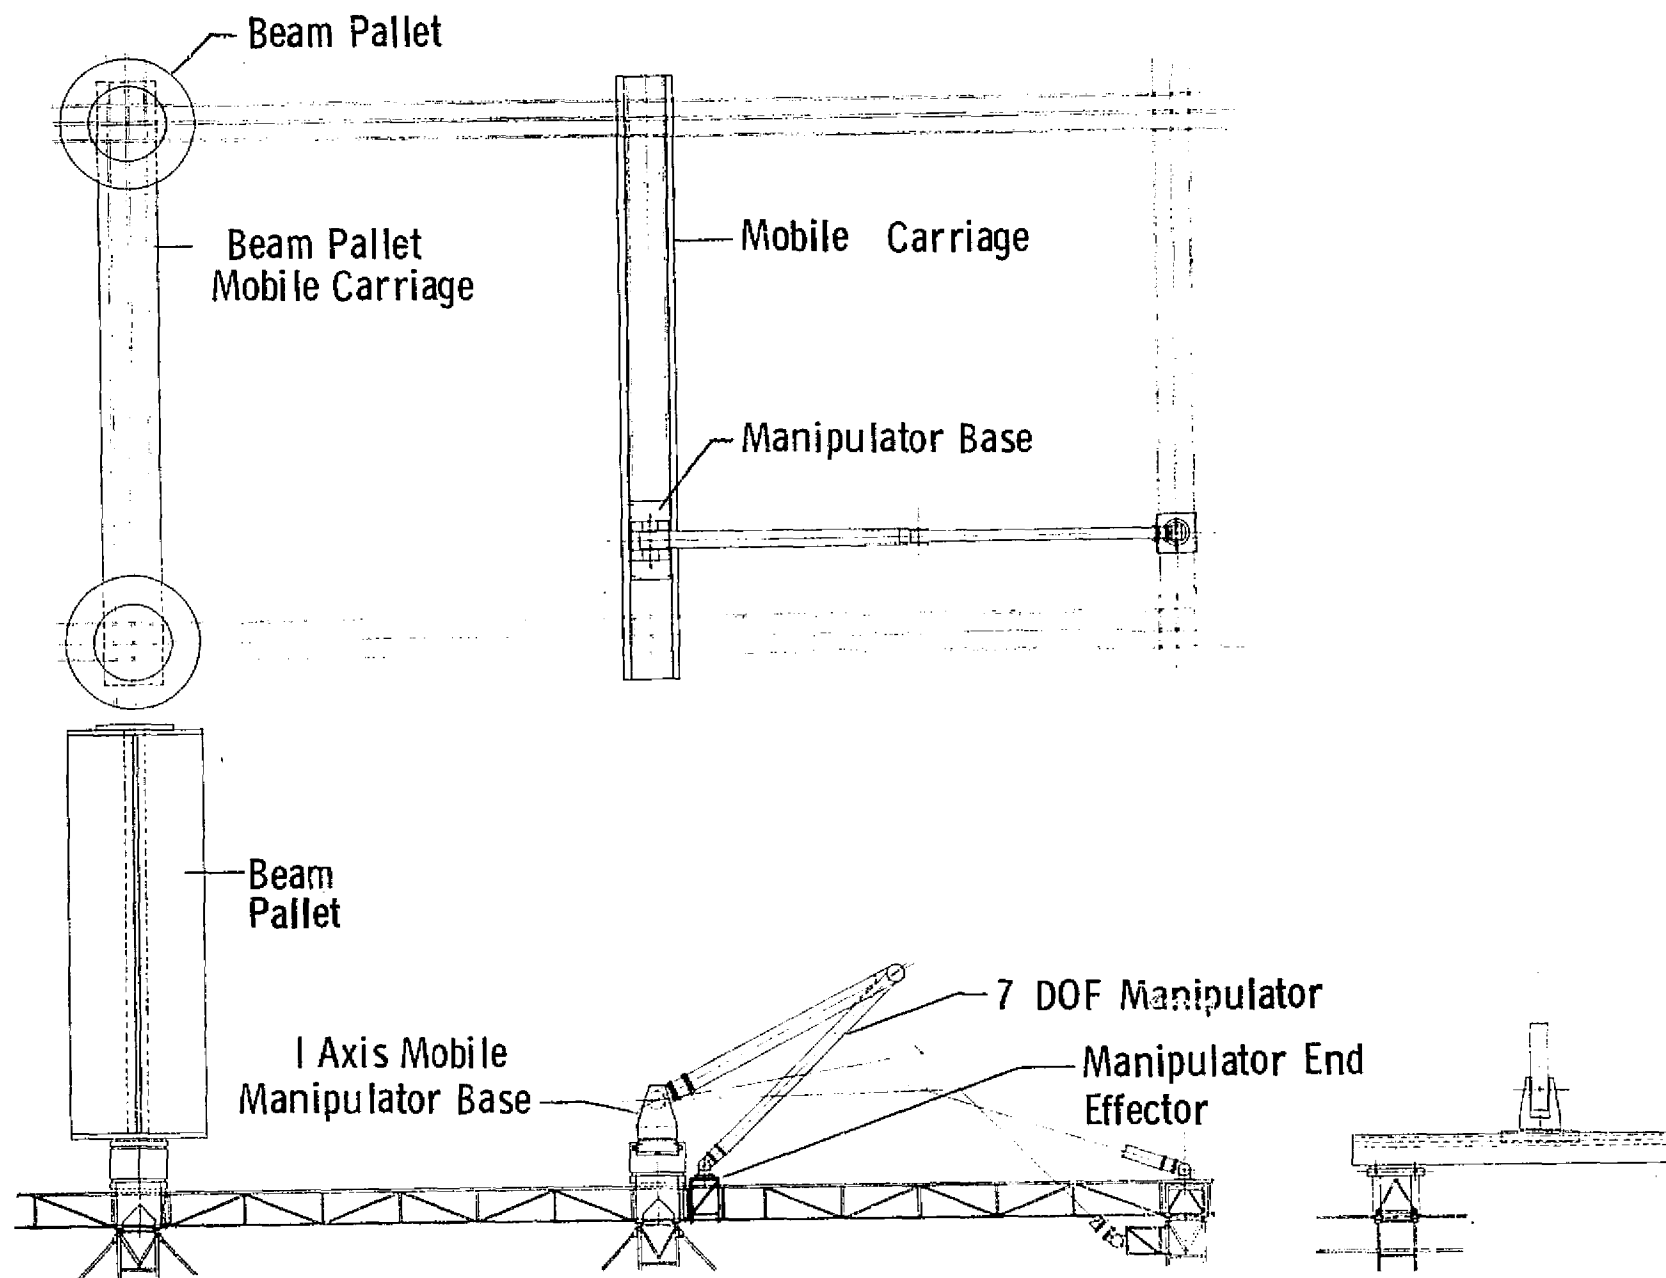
Mobile Assembler and Beam Holder Concept
